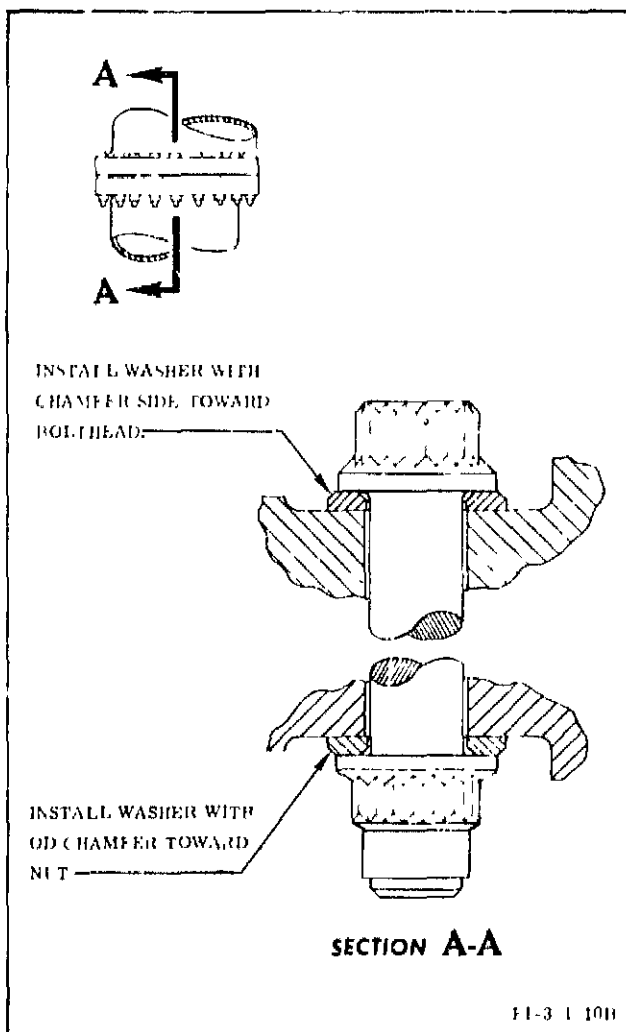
Installing Countersunk High-Strength and High-Bearing Washers
